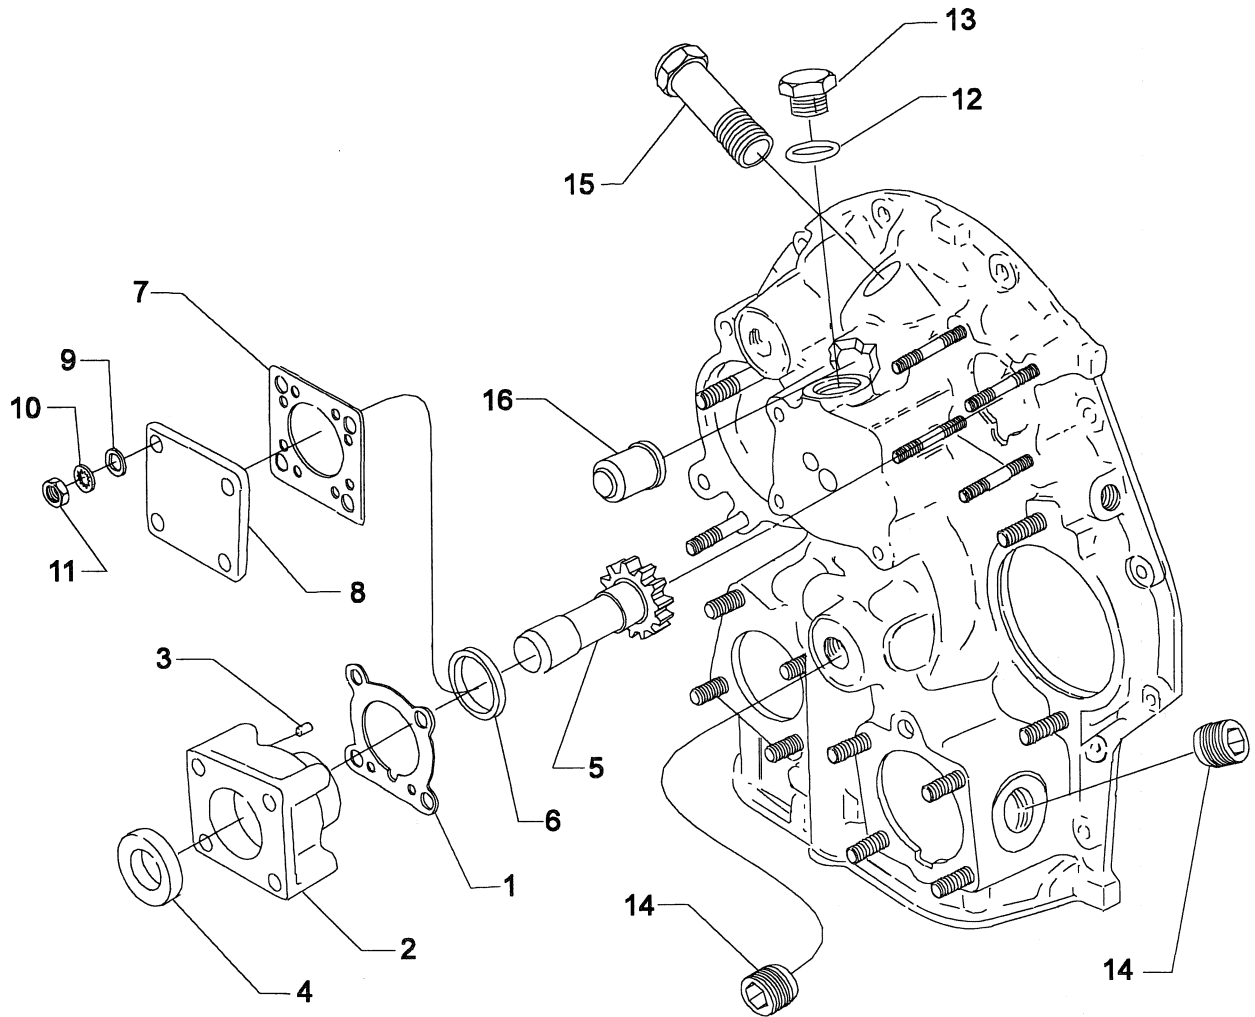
VACUUM PUMP DRIVE, OIL COOLER AND BREATHER FITTINGS
